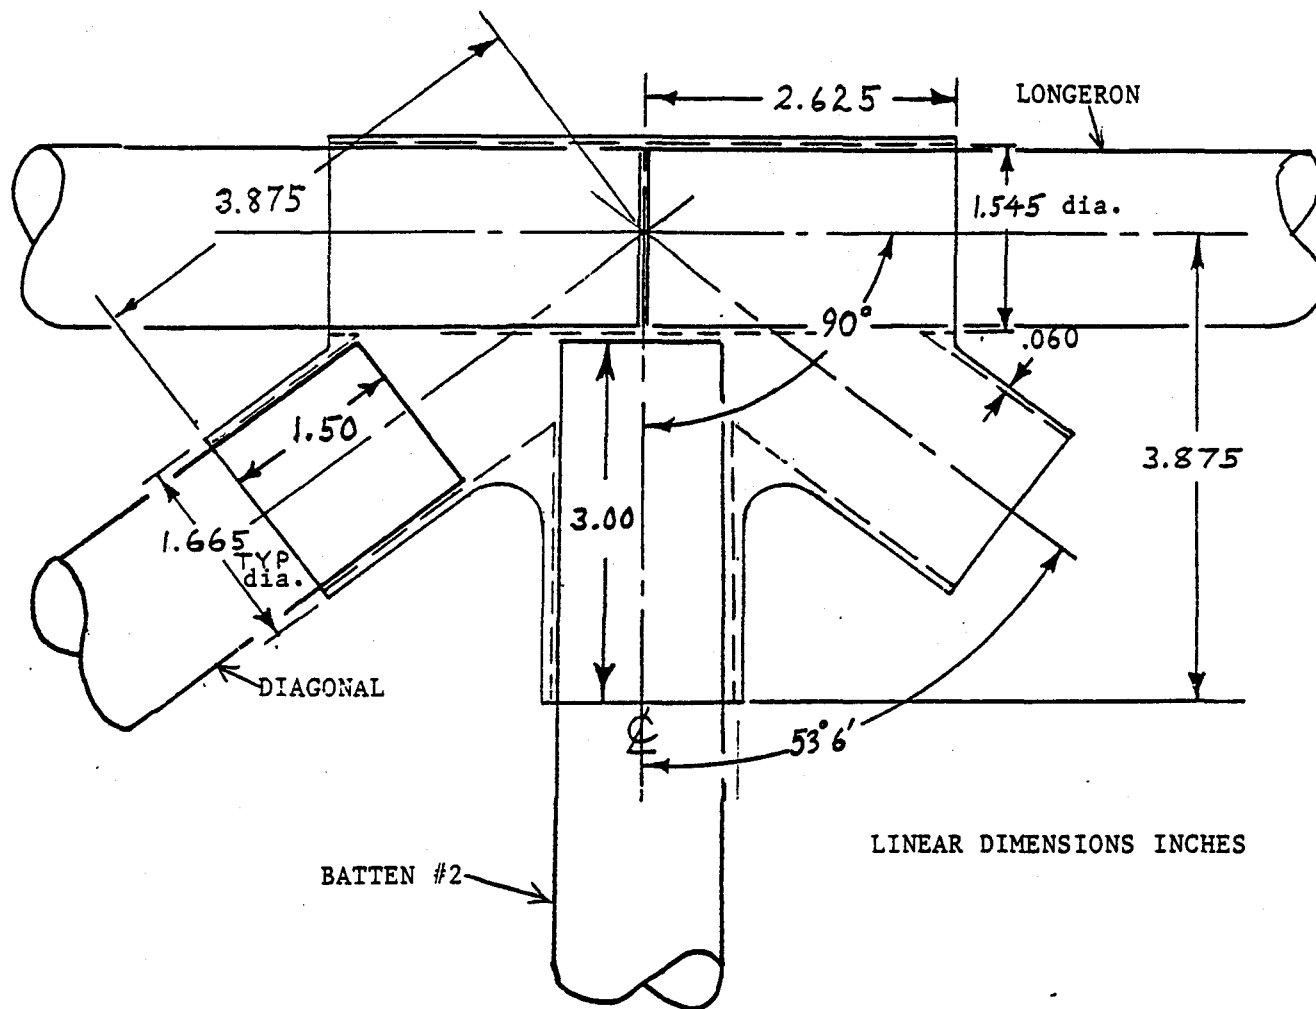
Tube Protrusions into End Fitting, Showing Batten #2.
